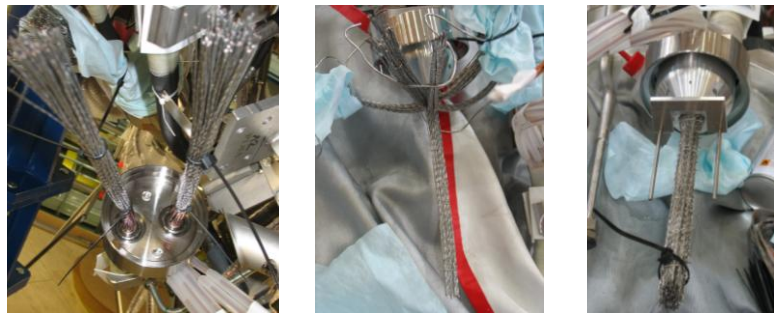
Various phases of joint assembly: T&C adapters welded to joint body (left), first layer of triplets soldered (centre), all 9 layers soldered (right)
